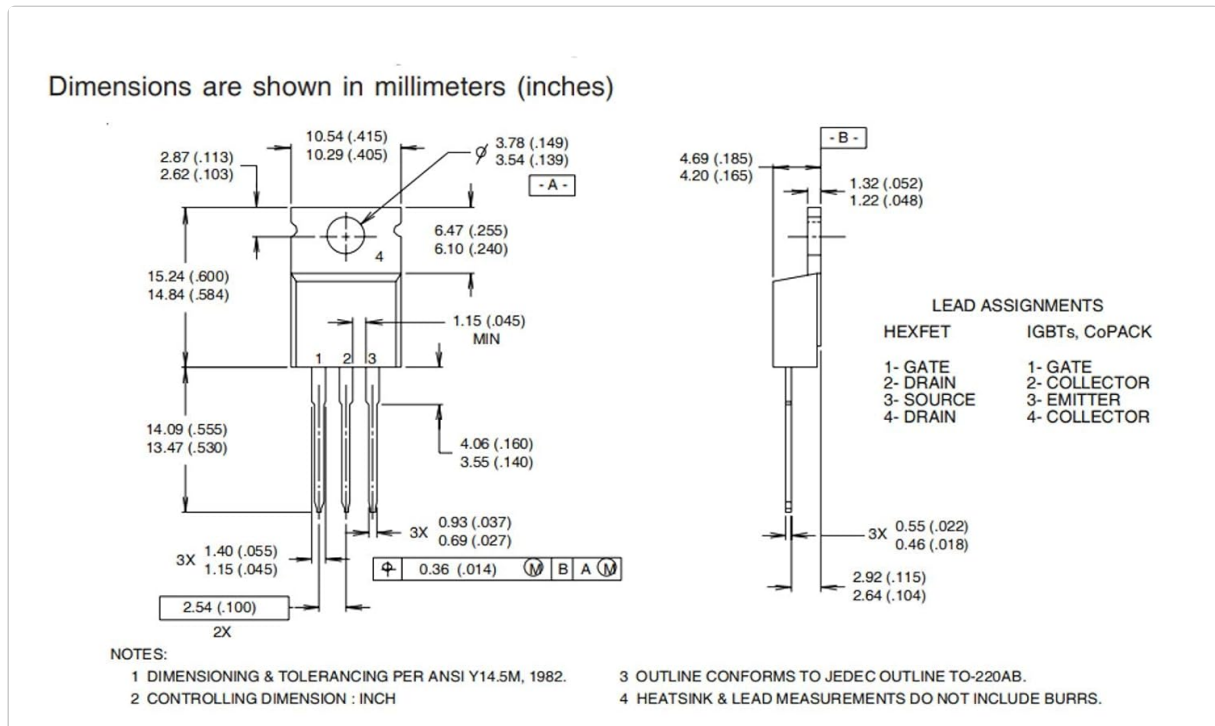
IRF540N TO-220 Package Dimensions and Lead Assignments. This technical drawing provides detailed measurements in millimeters and inches, along with the pinout configuration for both HEXFET and IGBTs/CoPACK devices. For the IRF540N MOSFET, the pins are typically 1-Gate, 2-Drain, 3-Source, and 4-Drain (connected to the metal tab).
